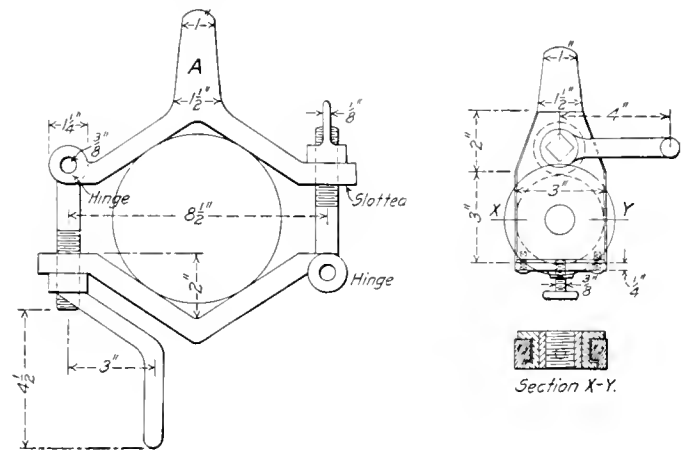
Clamp and End View of Axle Center Facing Jig.
